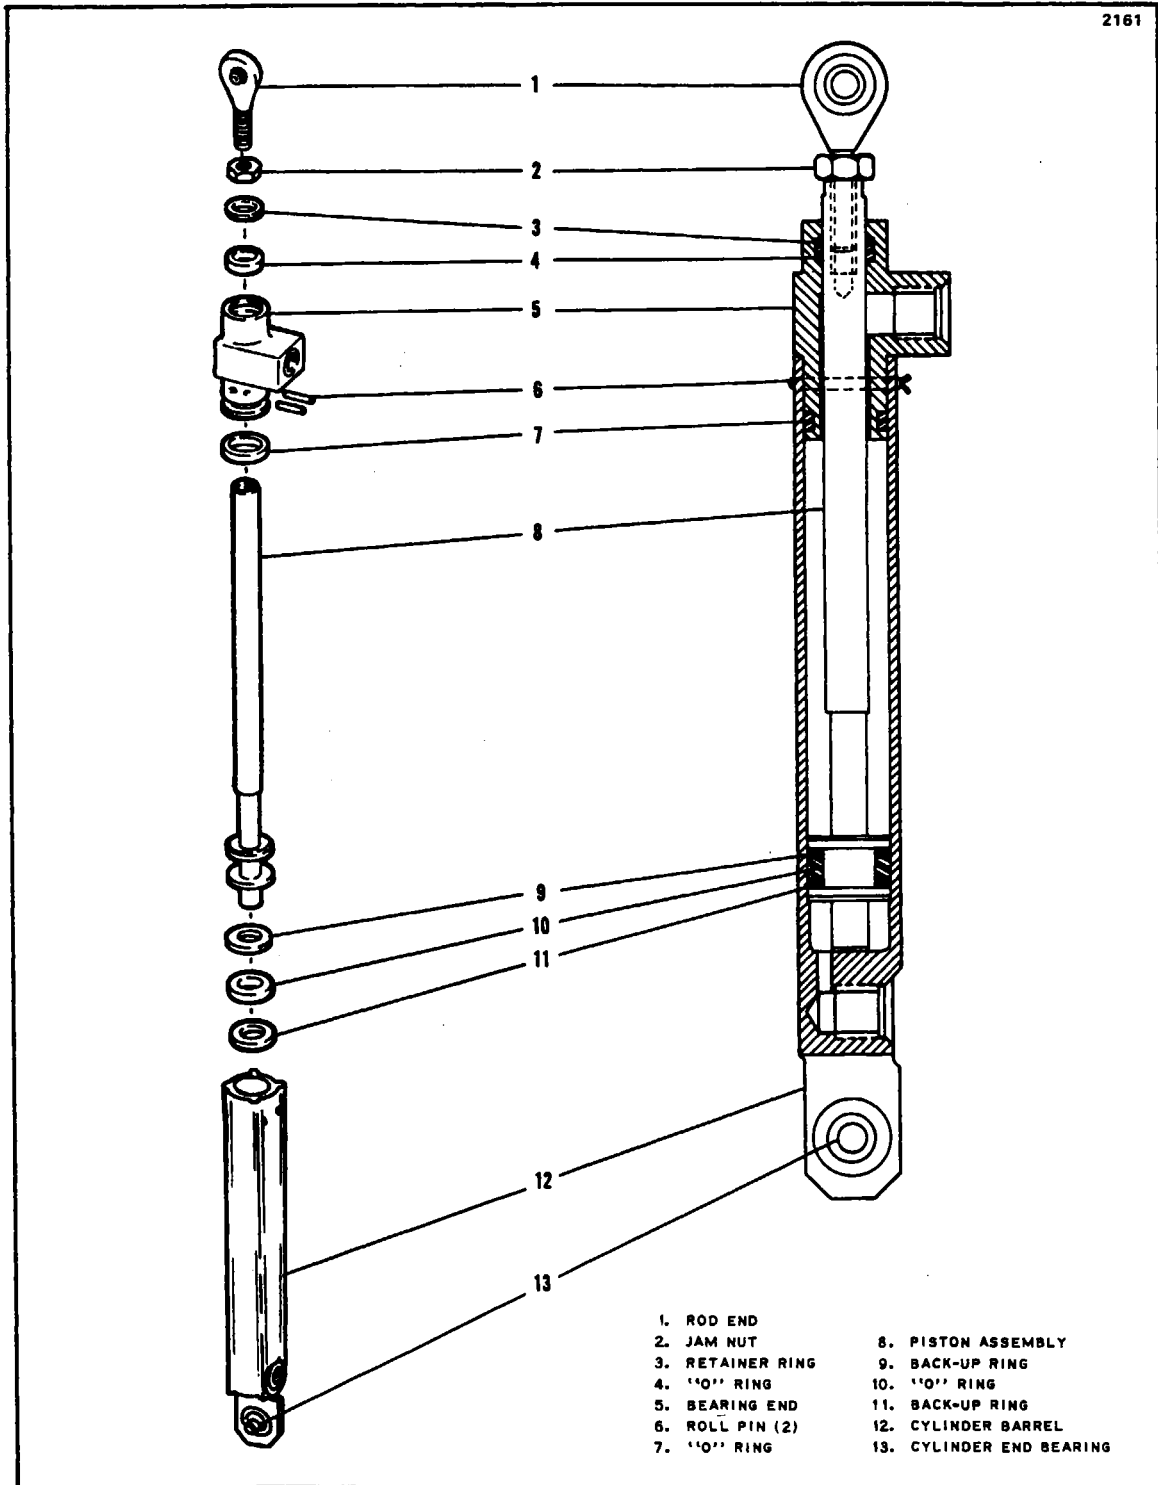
Nose Gear Door Actuating Cylinder (451 844 and 451 934)
